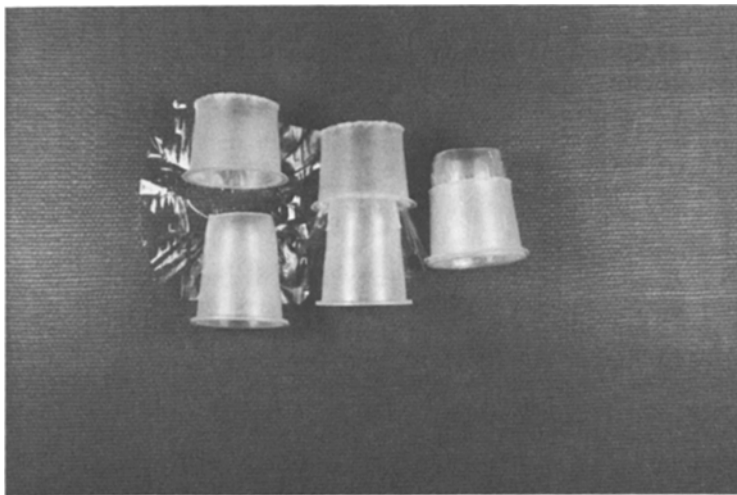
DISASSEMBLED, PARTIALLY ASSEMBLED, AND COMPLETED SAMPLE TUBE SEPTUM CAPS.
